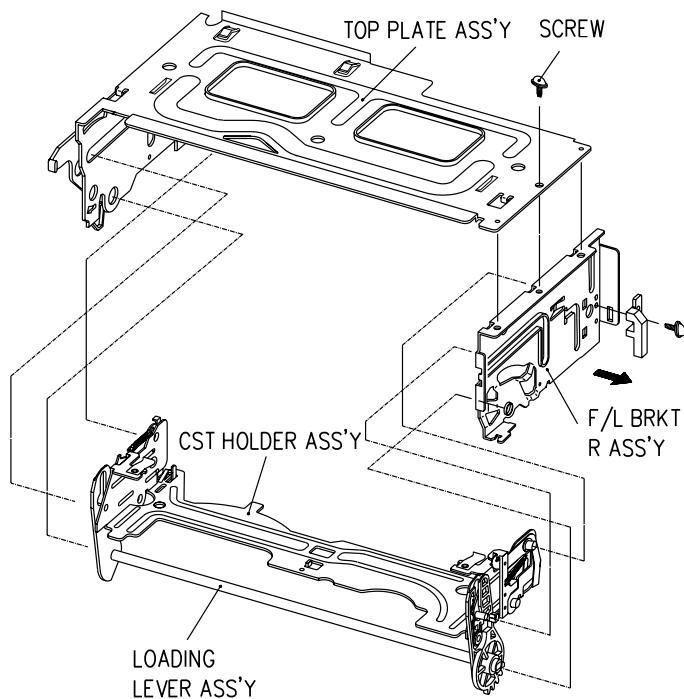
DISASSEMBLY OF THE FRONT LOADING ASS'Y
